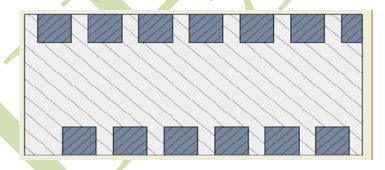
Sectional View of the Composite Spring with the Mandrel.
